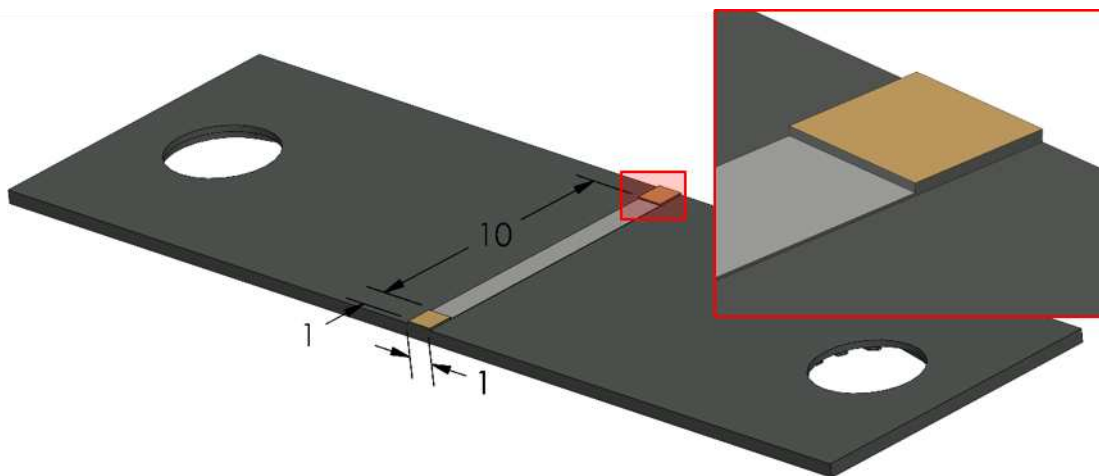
Test section back side with heater and contact pad, dimensions in mm (thickness not to scale)
